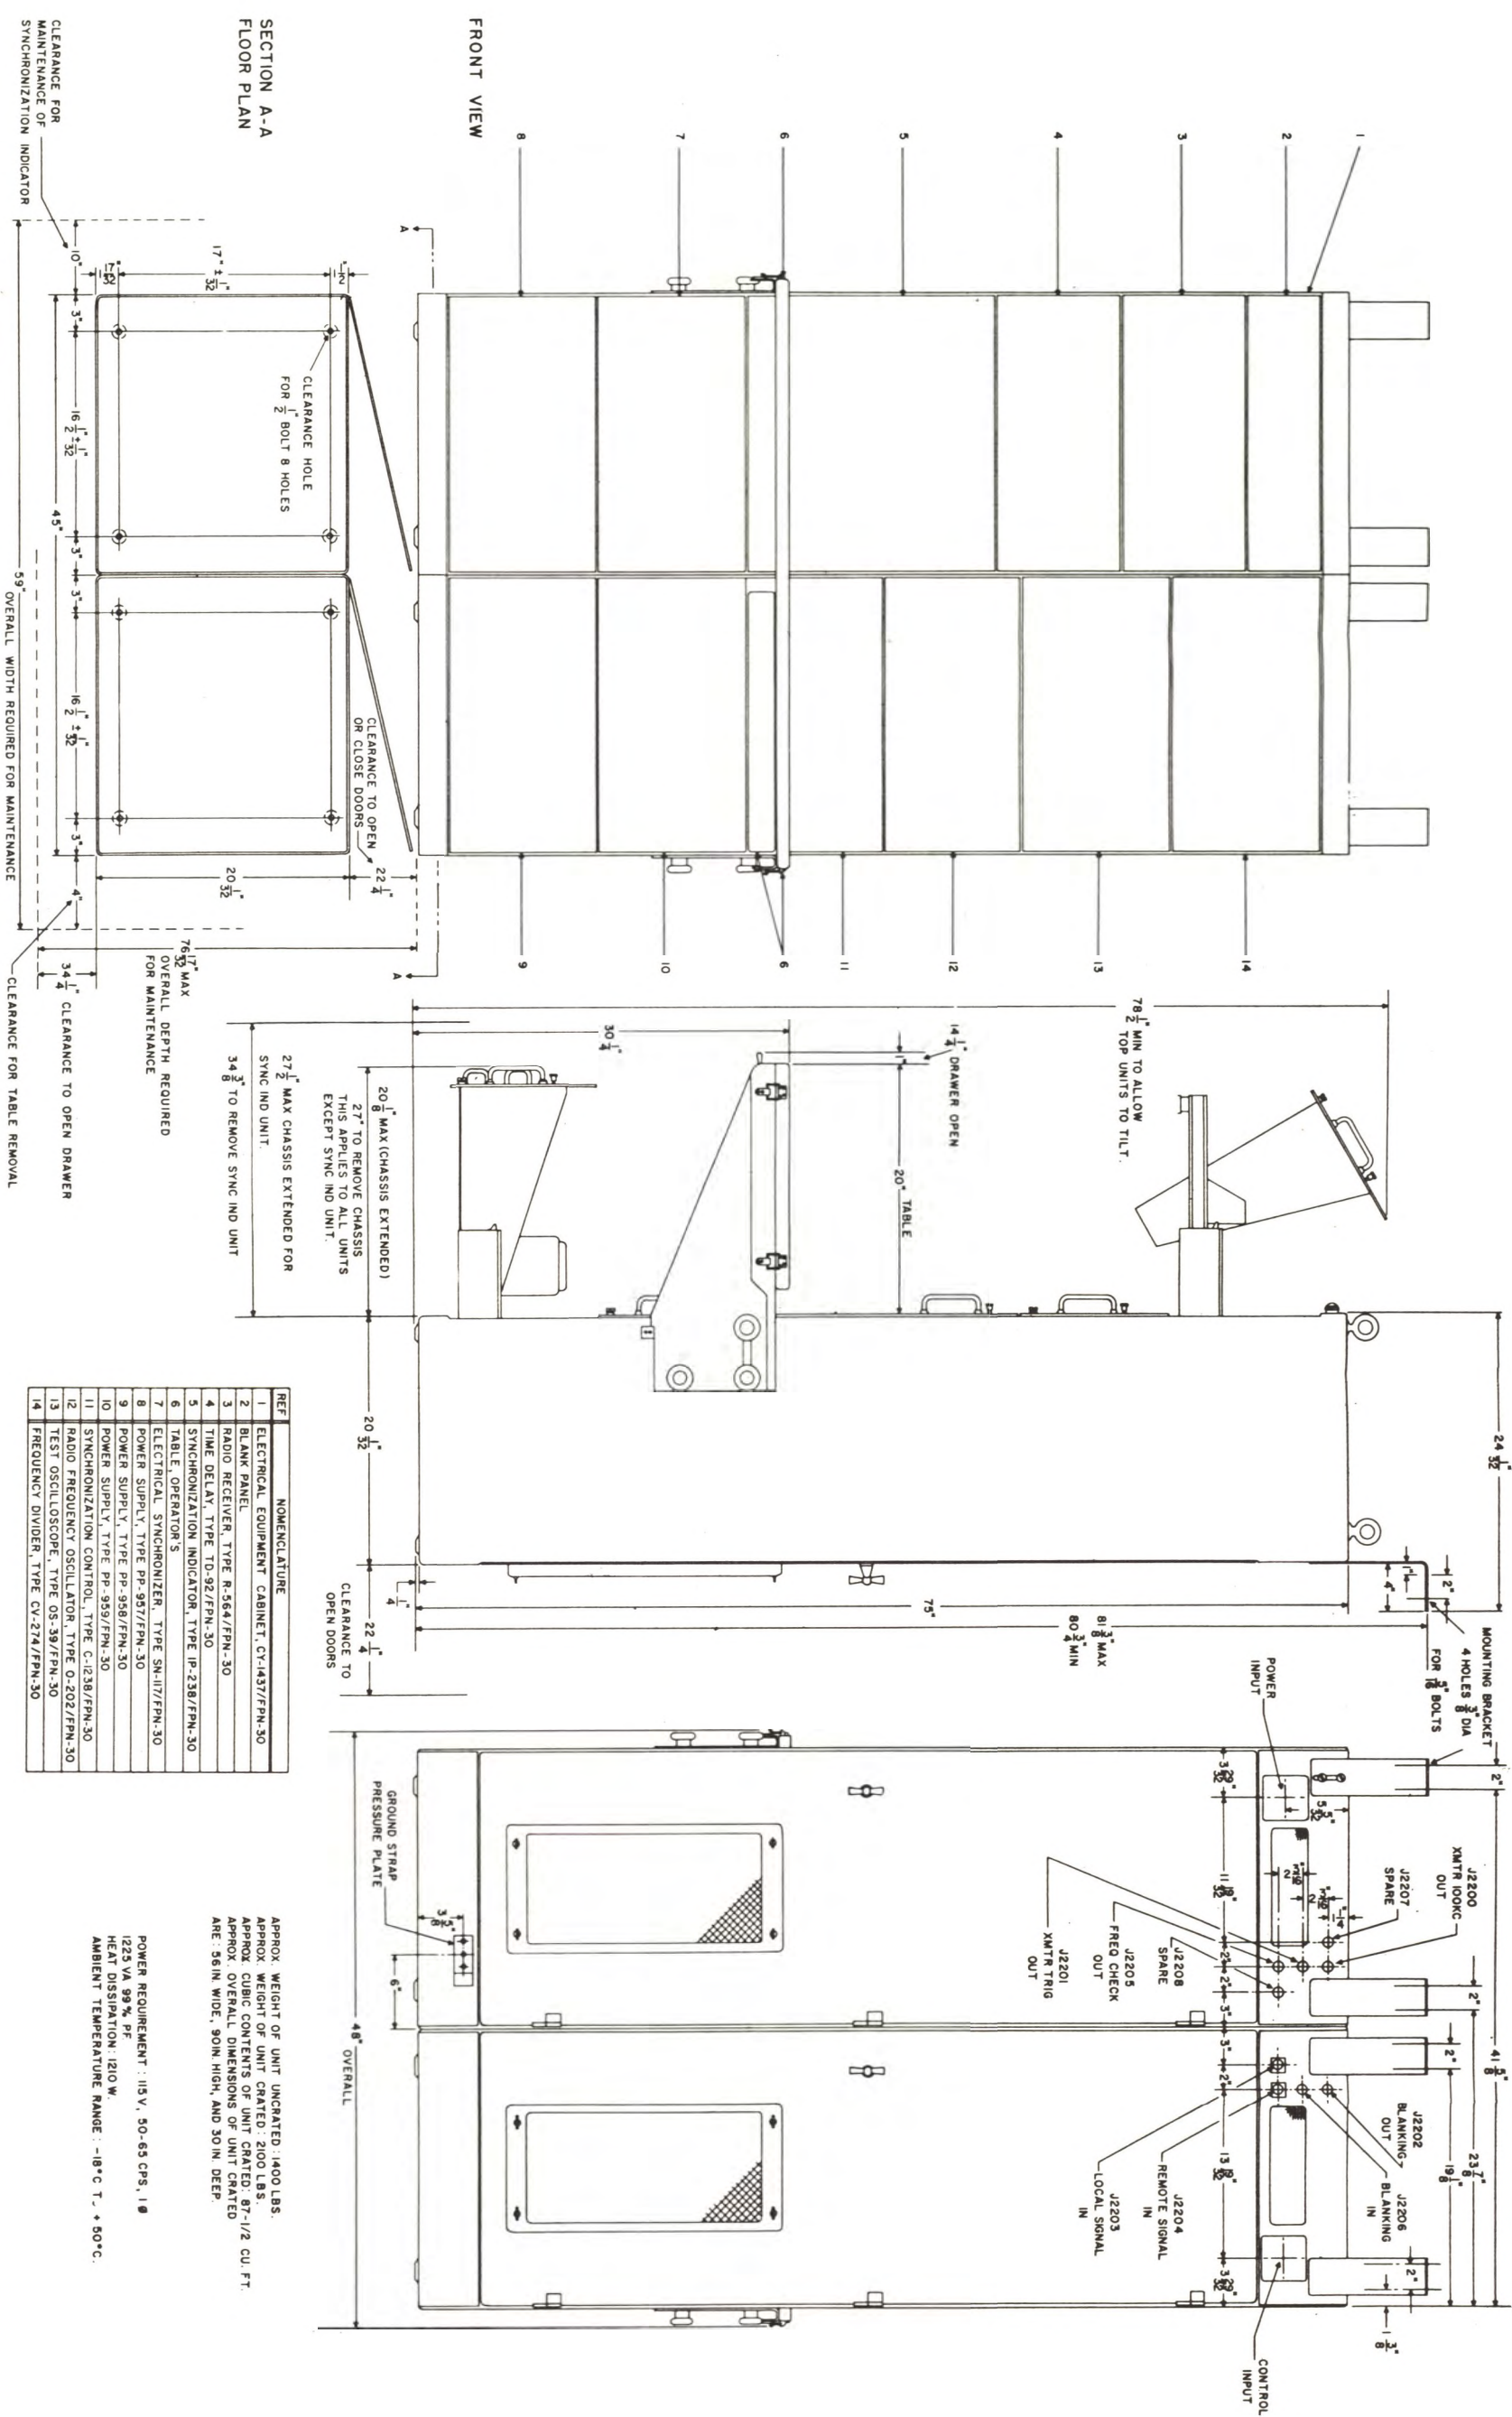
Electrical Cabinet CY-1437/FPN-30, Dimensional Data and Mounting Details
